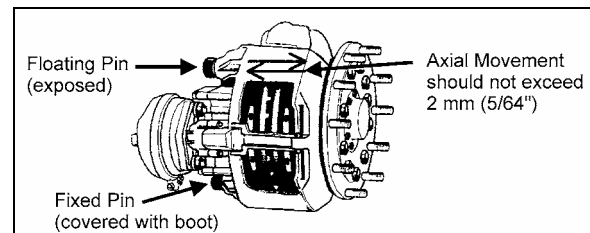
CALIPER AXIAL MOVEMENT 12132
